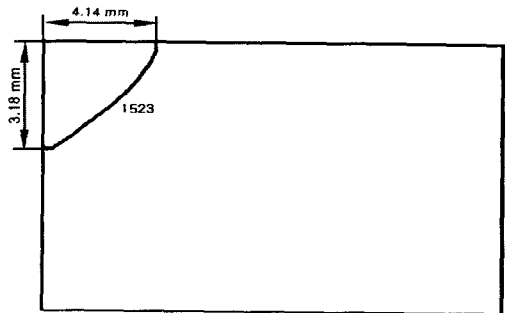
Liquid-solid interface of the GMA welding process at 0.5 s
